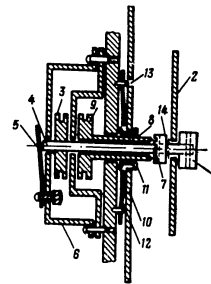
Kinematic diagram of the mechanism: 1-knob; 2-plane silhouette; 3-first pulley; 4-pivot; 5-blade spring; 6-wicket-shaped support; 7-notched metal wheel; 8-tubular pivot; 9-second pulley; 10-radio bearing scale; 11-tubular sleeve; 12-mounting board; 13-access hole; 14-spiral spring.
